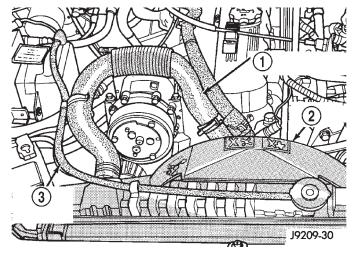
Upper Radiator Hose, Coolant Recovery Hose & Fan Shroud
